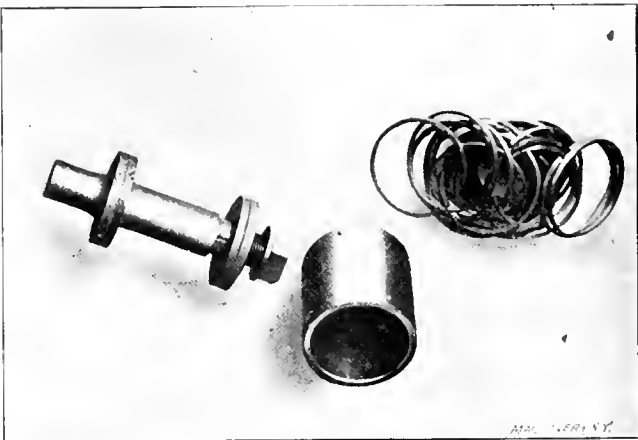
Mandrel for Holding Rings when Grinding the Outside
